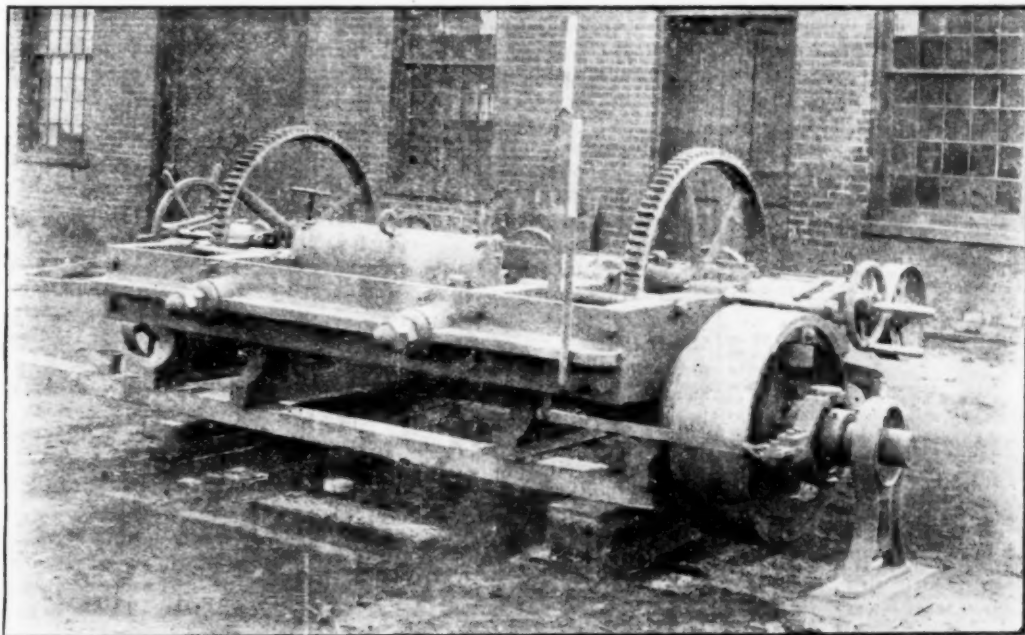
“BLAKESLEE” VENEER-CUTTING MACHINE.
